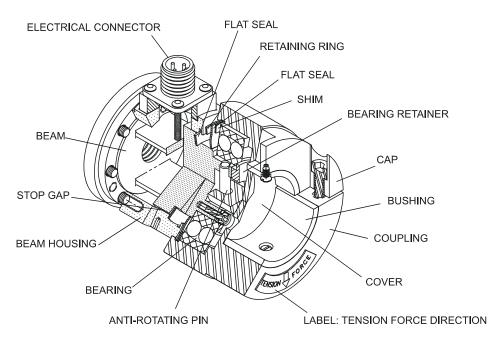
LIVE SHAFT VERSION CUT-AWAY VIEW
